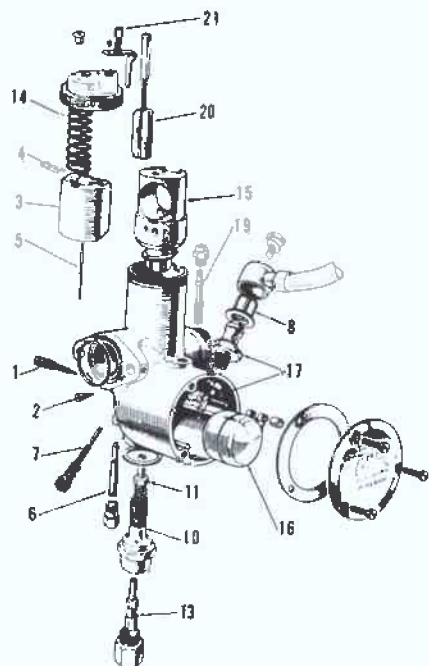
Exploded view of typical Amal Monobloc carburetor used. Refer to Fig. TM4-2 for view of Amal Concentric float carburetor.
